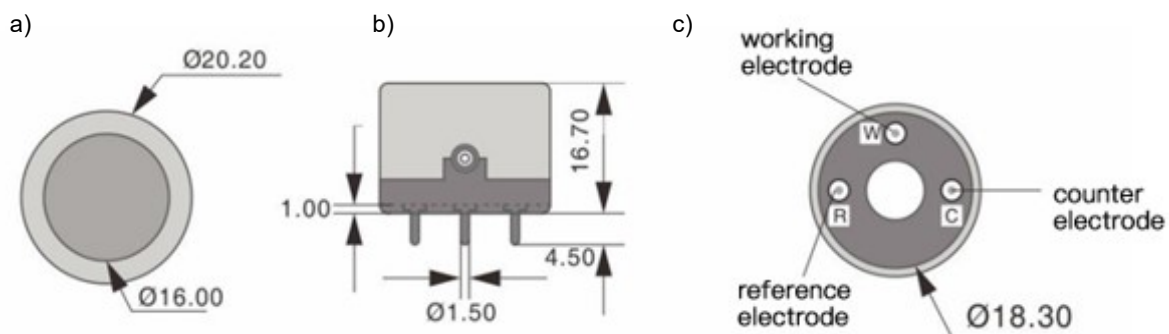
Mechanical dimensions in mm a) top view b) projection view c) bottom view
